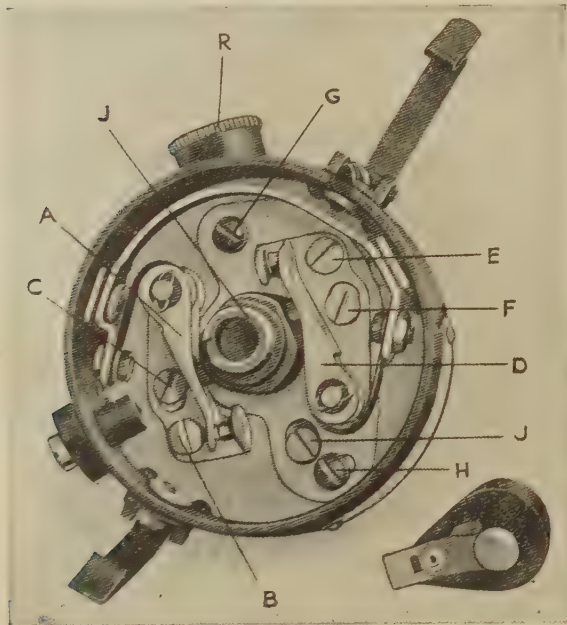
The Leyland Double-lever Contact-breaker Unit.
